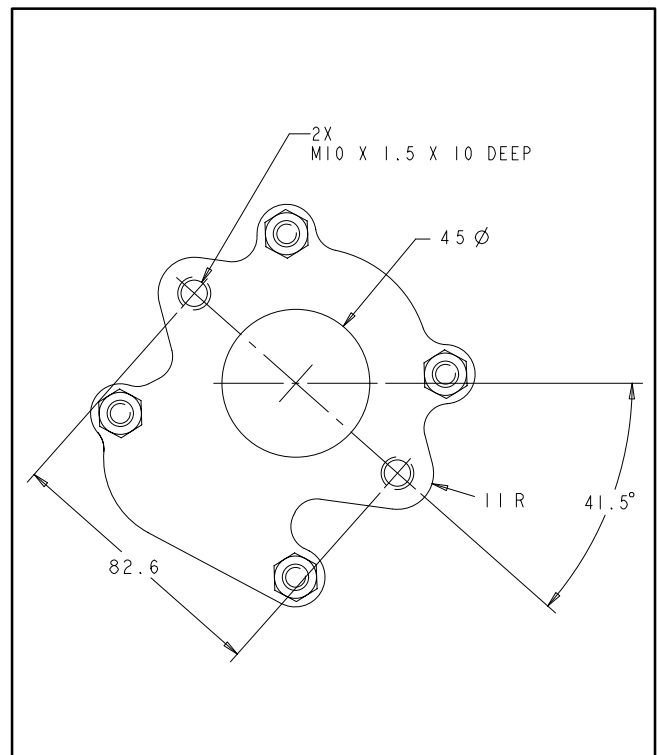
EXHAUST FLANGE—TURBOCHARGED ENGINES
